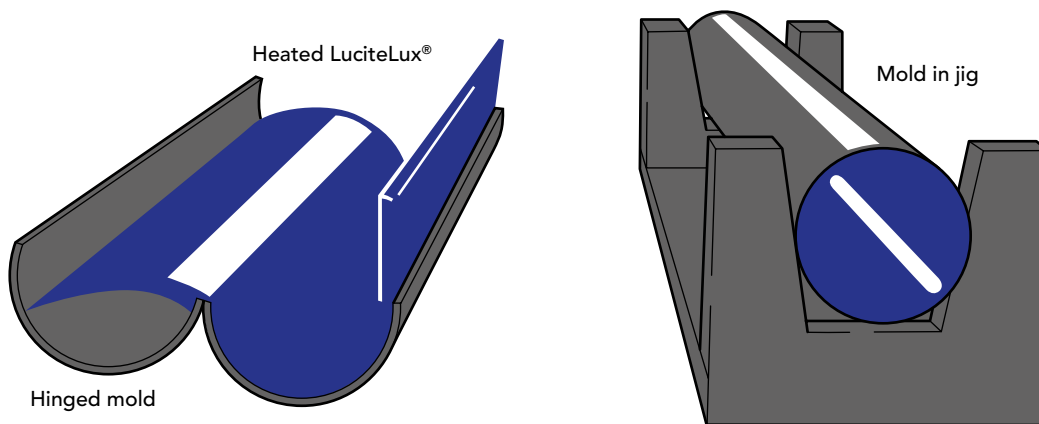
illustrates the method and tooling. The technique is useful for producing large diameter tubes for display models for example which cannot be conveniently made by casting.
